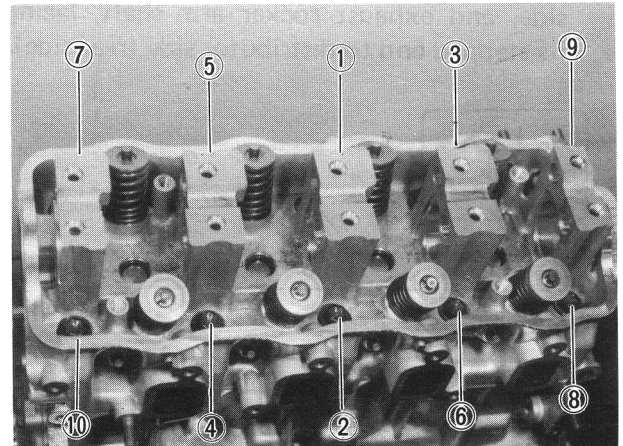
Tightening sequence of cylinder head bolts
